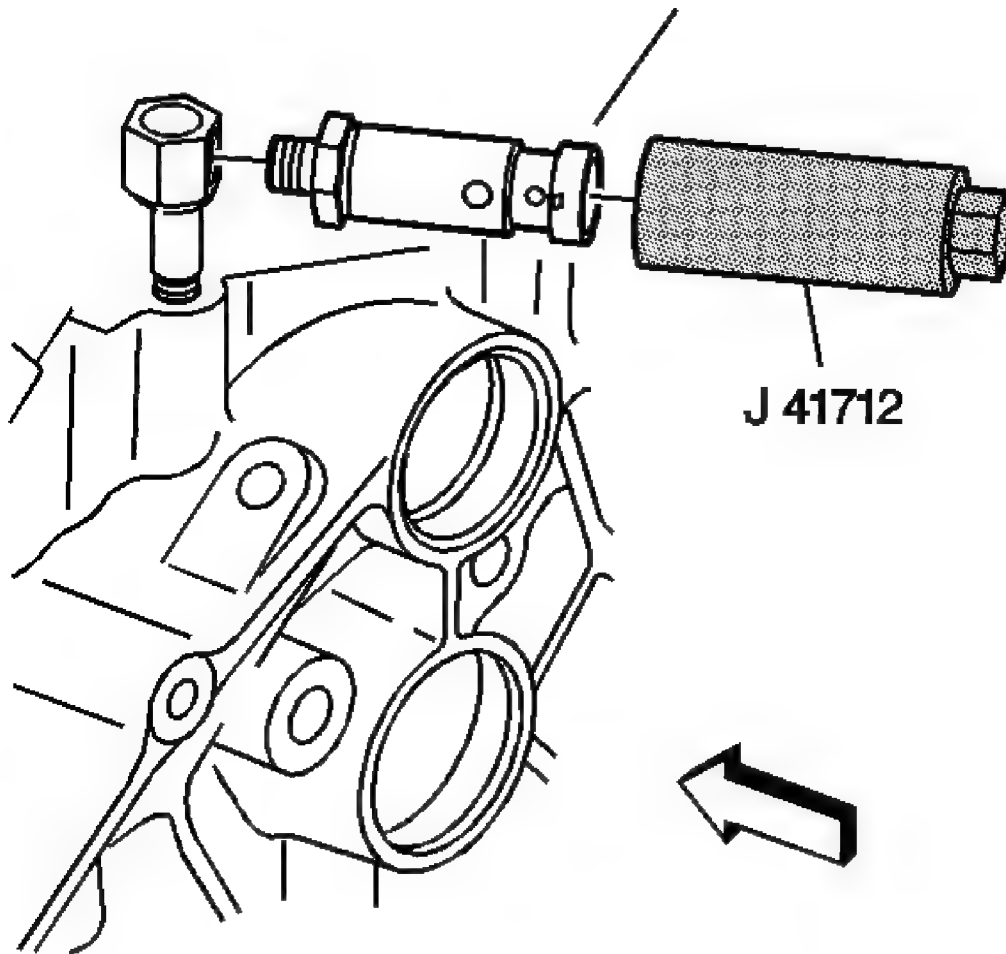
View Of Engine Oil Pressure Gage Sensor
